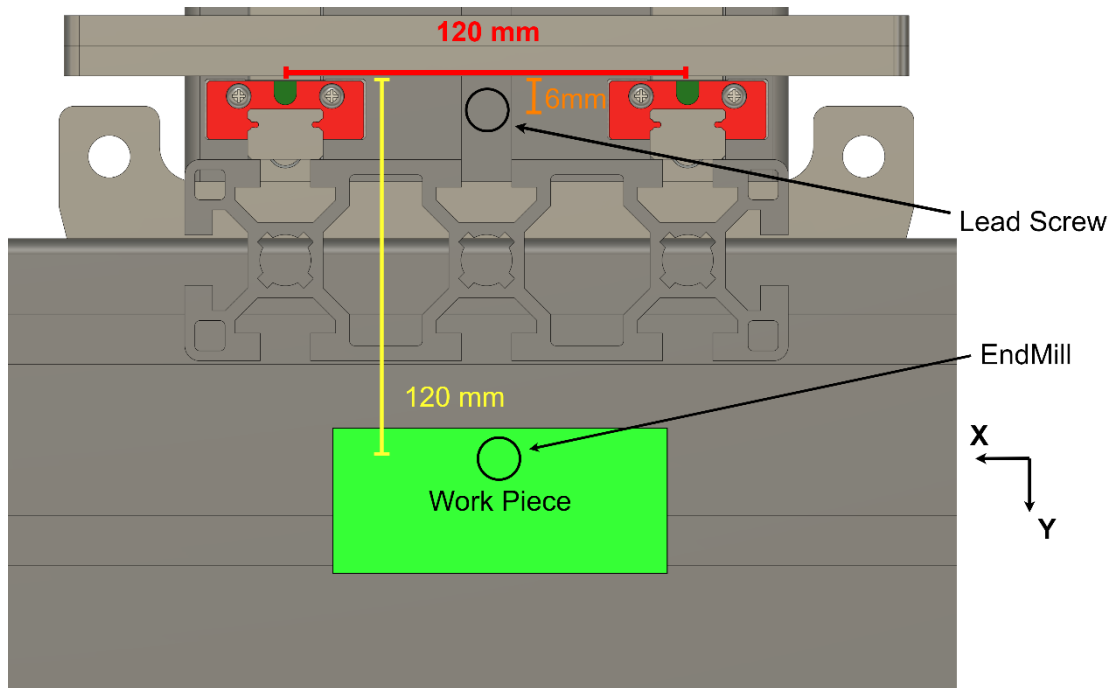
Z rail top view of the machine, where the axis is equipped with MNG15H linear rail assemblies. All distances and measurements can be easily identified and prompted into the linear rail configurator tool.
